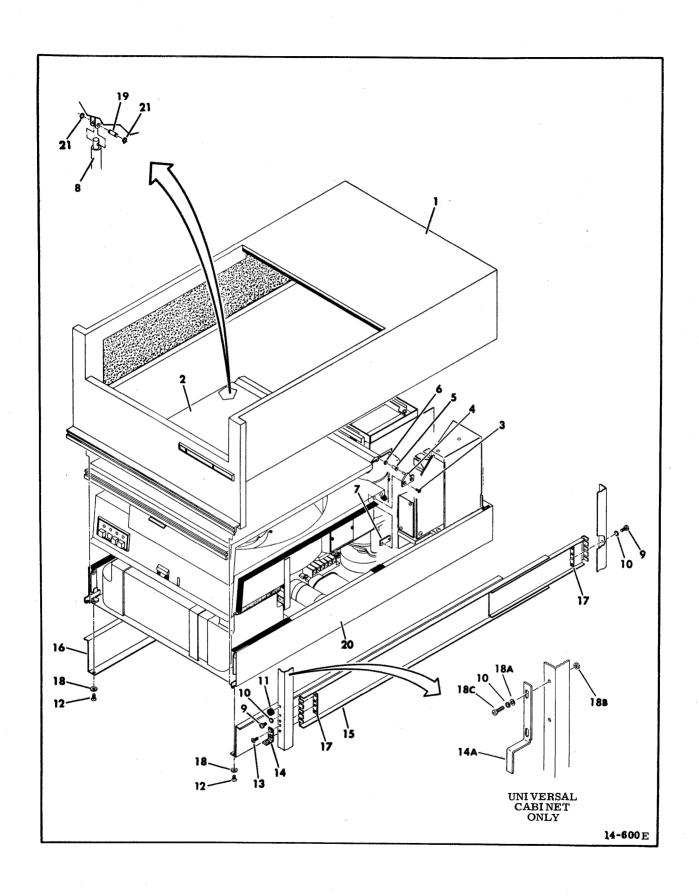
Final Assembly - 36 Inch Rack Mount 83322150 W
